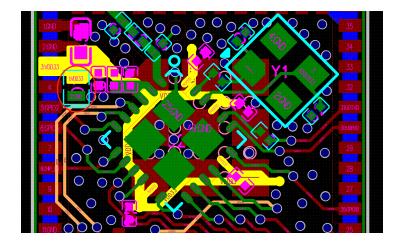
ESP32-C2 Power Traces in a Four-layer PCB Design
